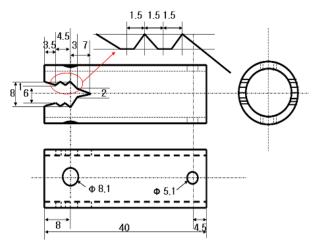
Drawing of a double tube compact tension (DTCT) specimen for the HTMA Alloy 600 tube.
